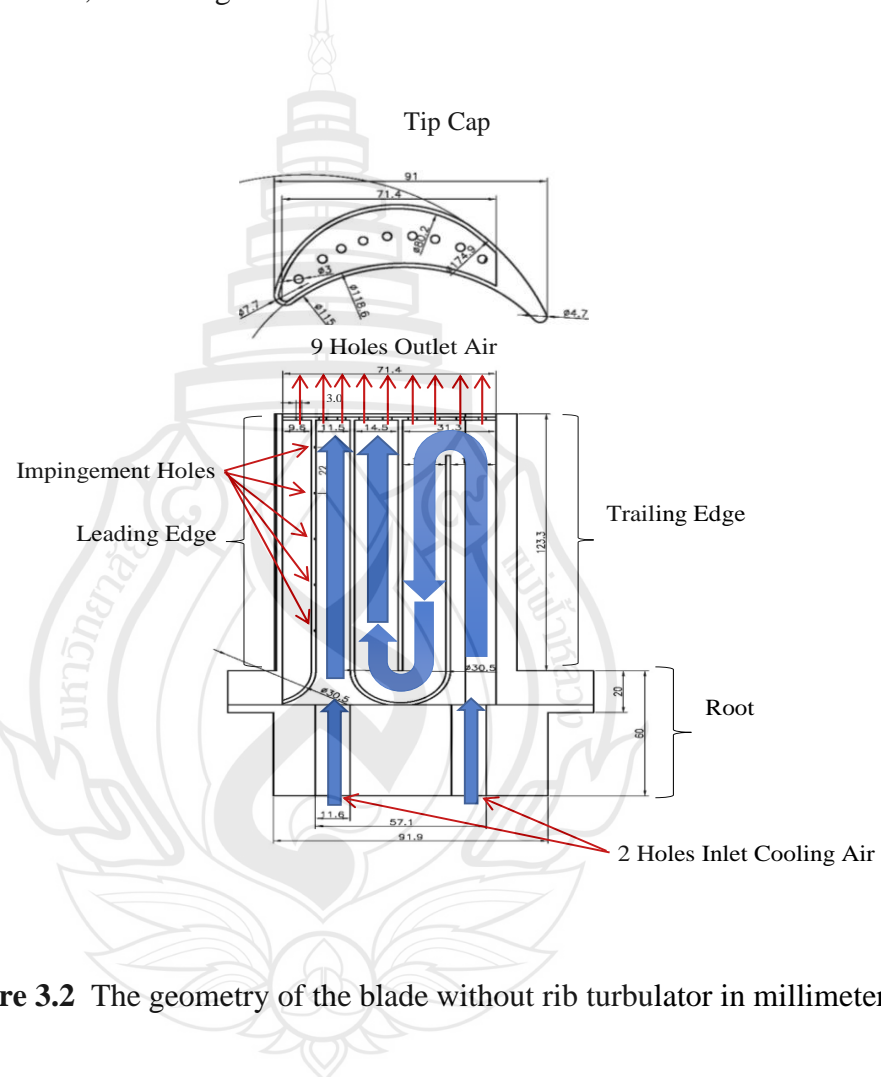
The geometry of the blade without rib turbulator in millimeters
